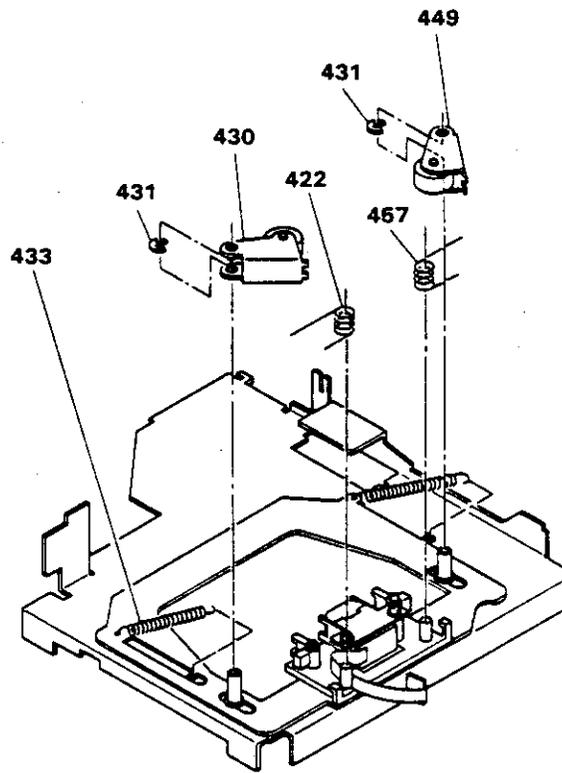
PINCH ROLLER ASSEMBLY
